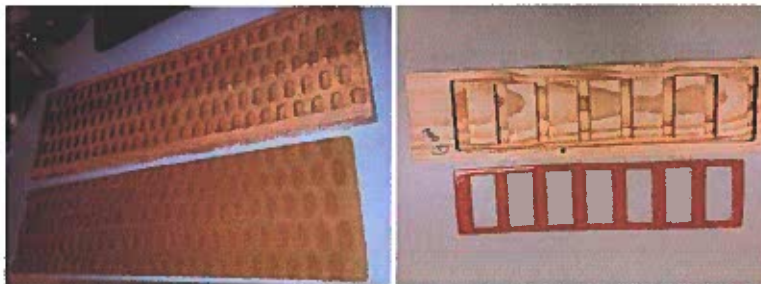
A) OUTER TREAD LAYER (LEFT) AND B) INNER TREAD LAYER (RIGHT)
